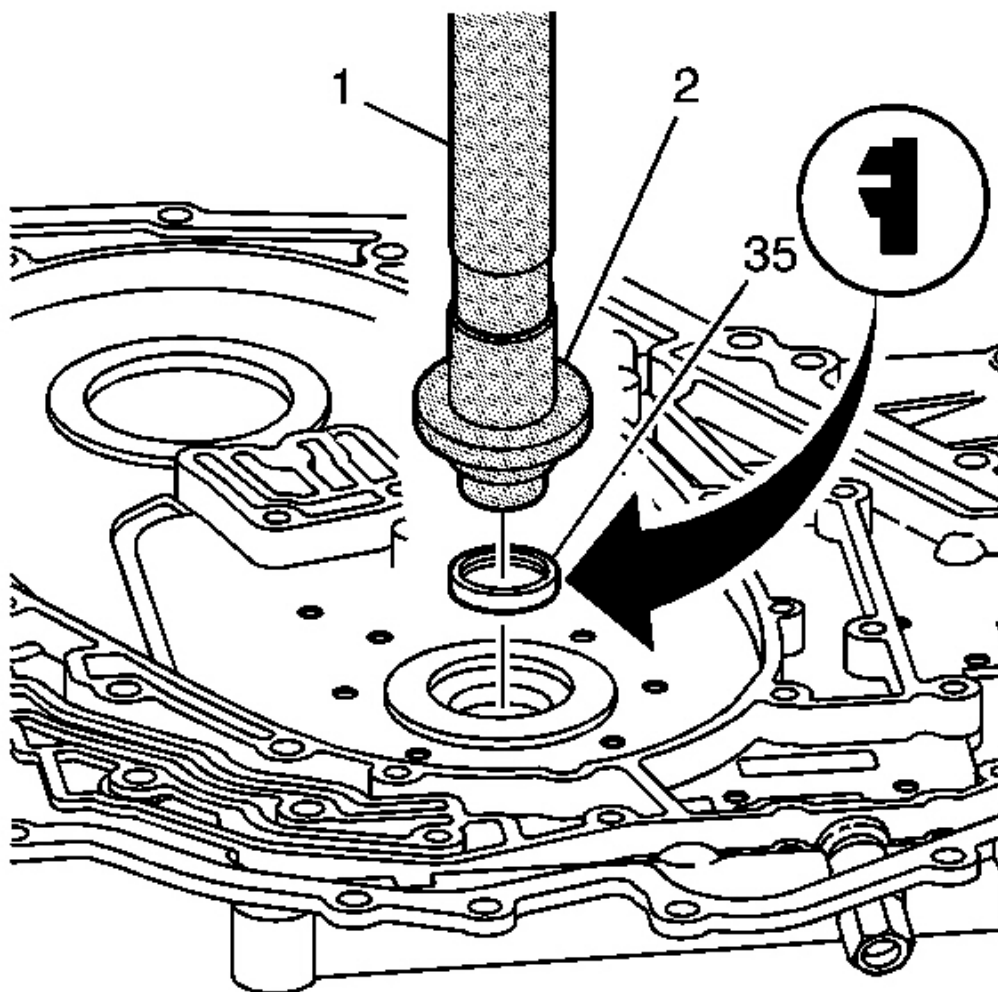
Installing The Case Cover To Turbine Shaft Seal Using J 39062
